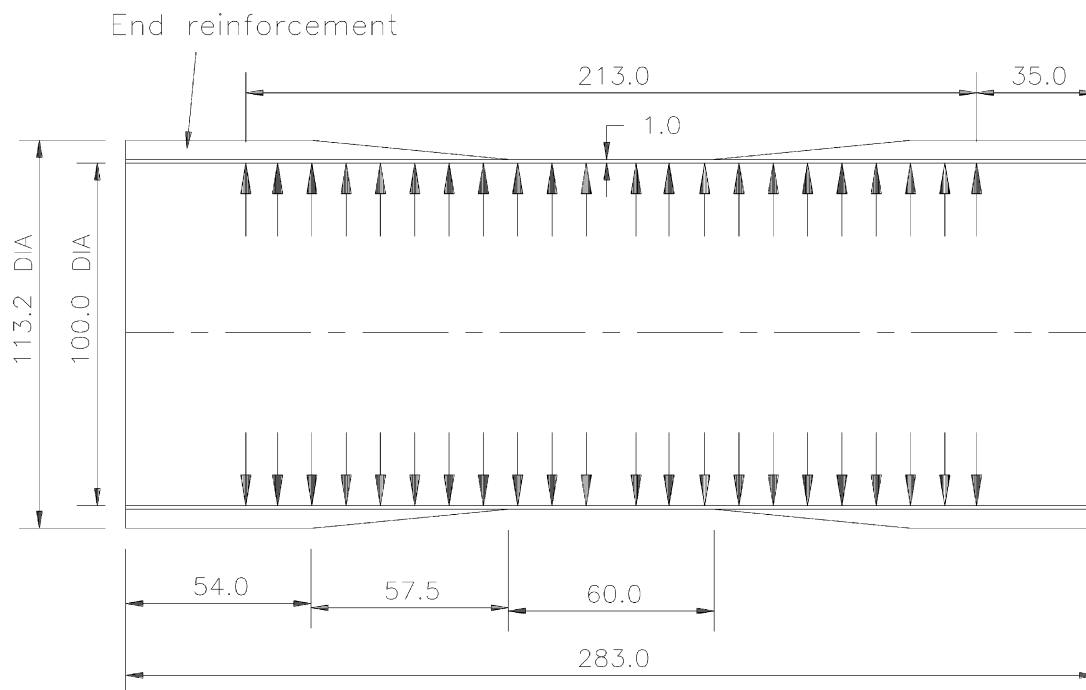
Geometry of the tubular specimen. (Inner diameter = 100 mm, thickness = 1 mm, overall length = 283.0 mm).
